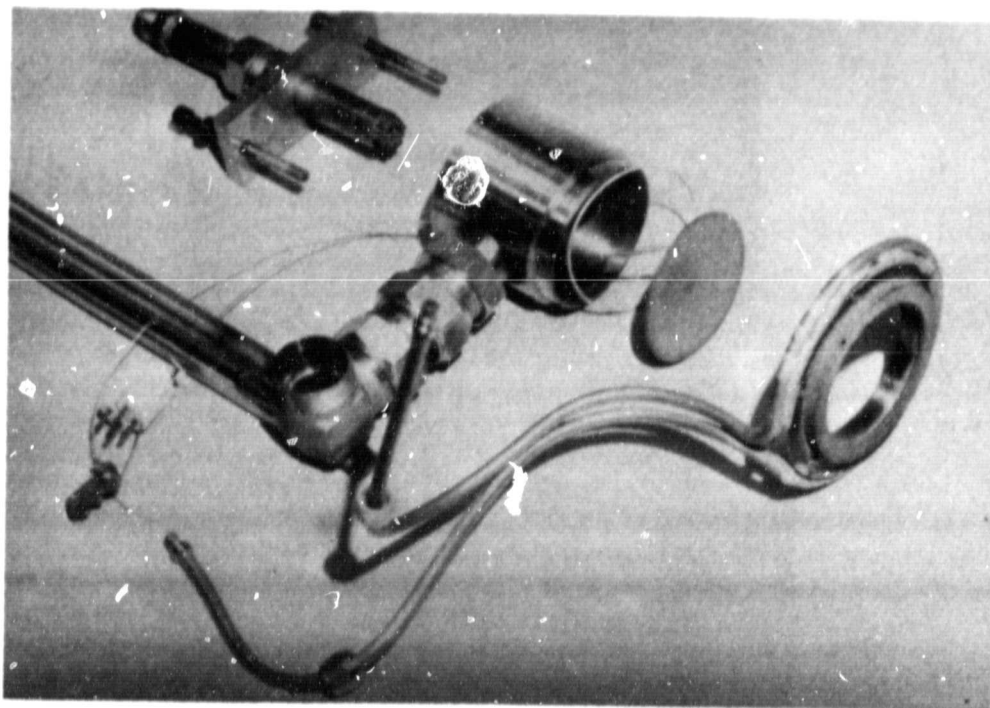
Exploded view of calibration fixture to position the test sensor in front of the quartz lamp bank.
